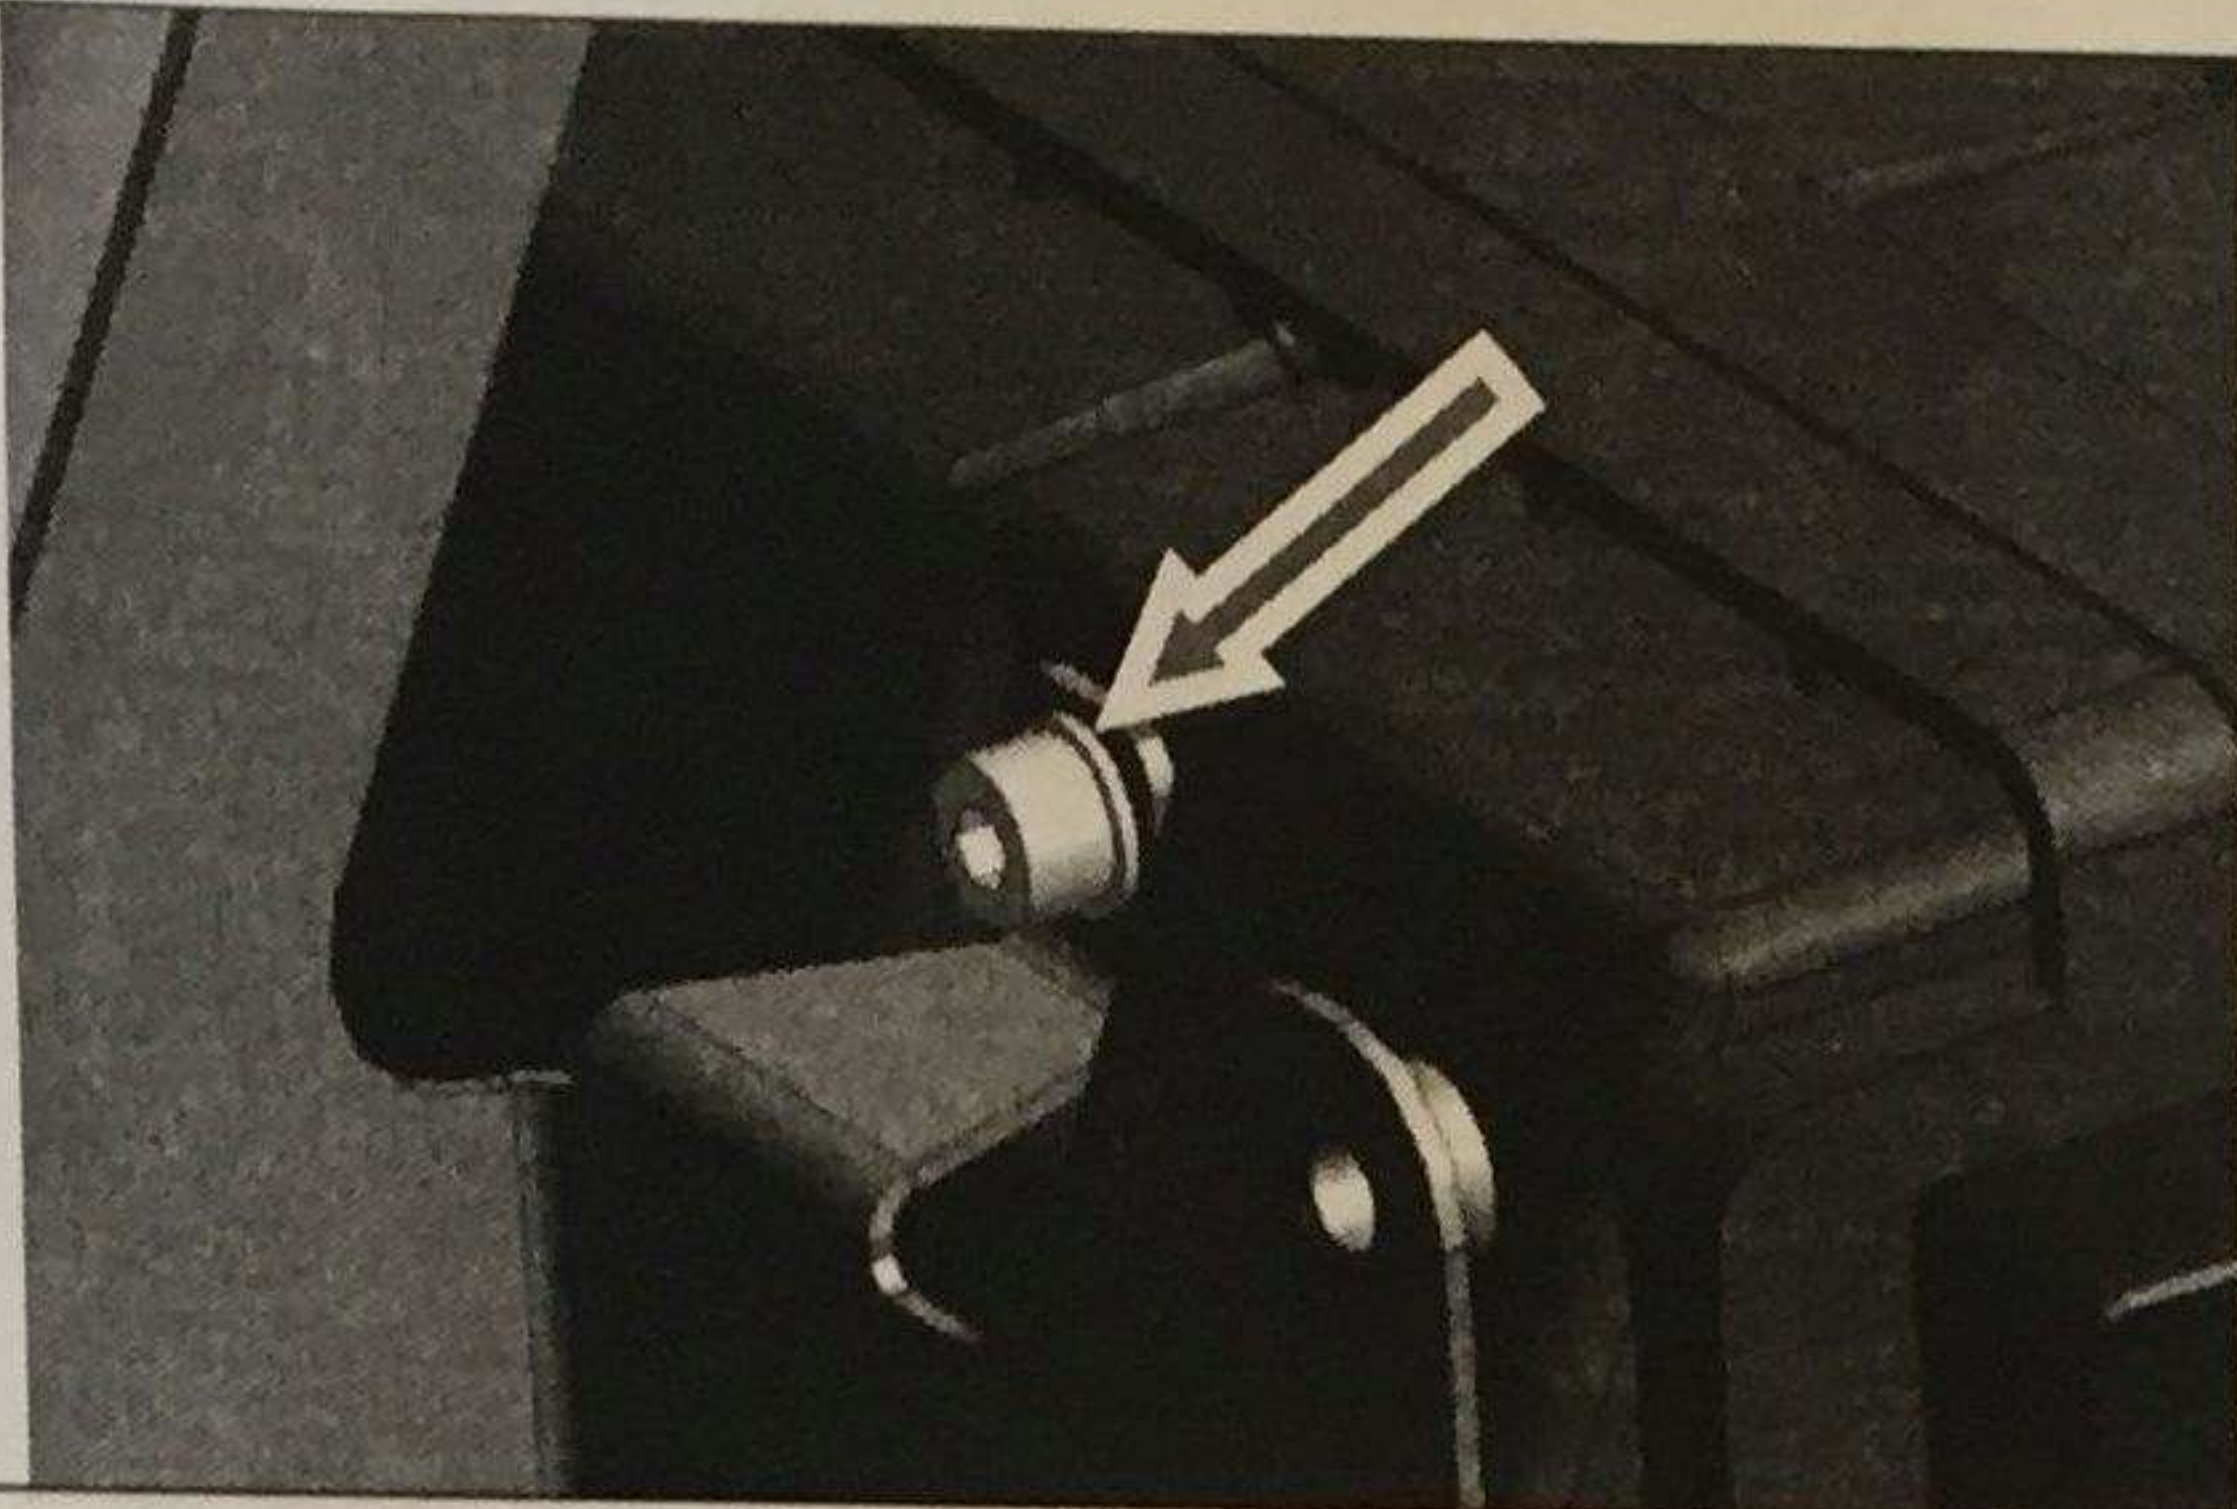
VCU Assembly and Mounting Brackets
